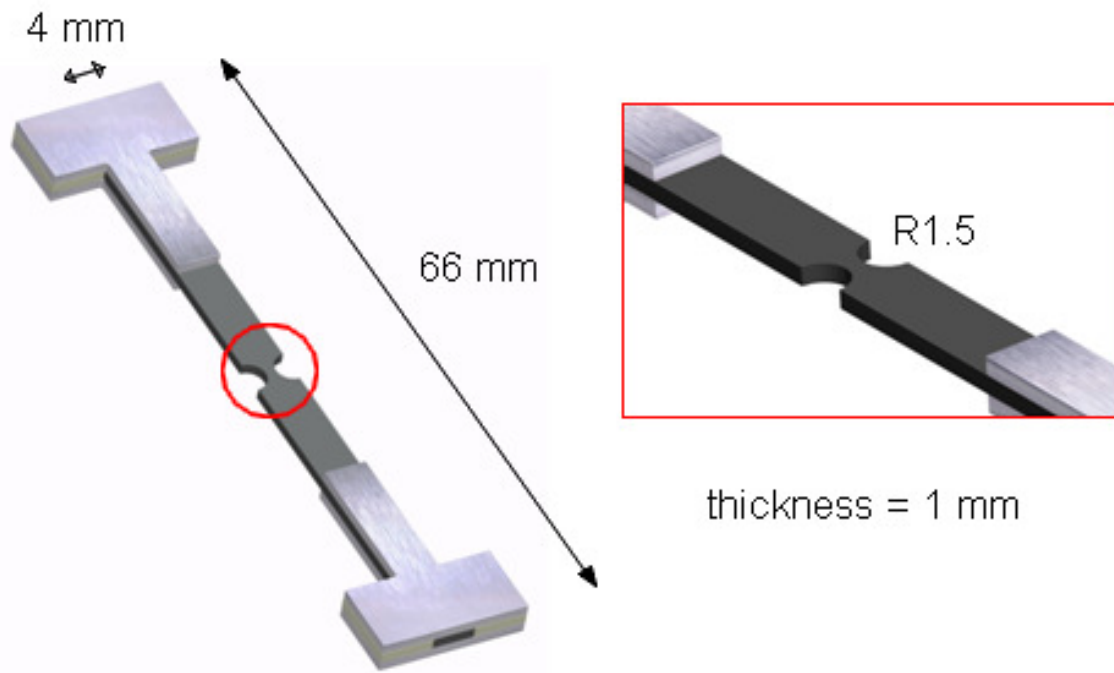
4 - Schematic representation of specimen geometry and dimensions.
